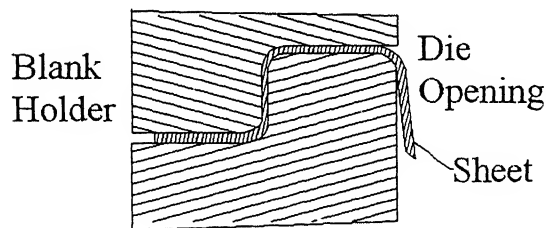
The drawbead placed inside the blankholder region or on the edge of die(die edge)[4]
